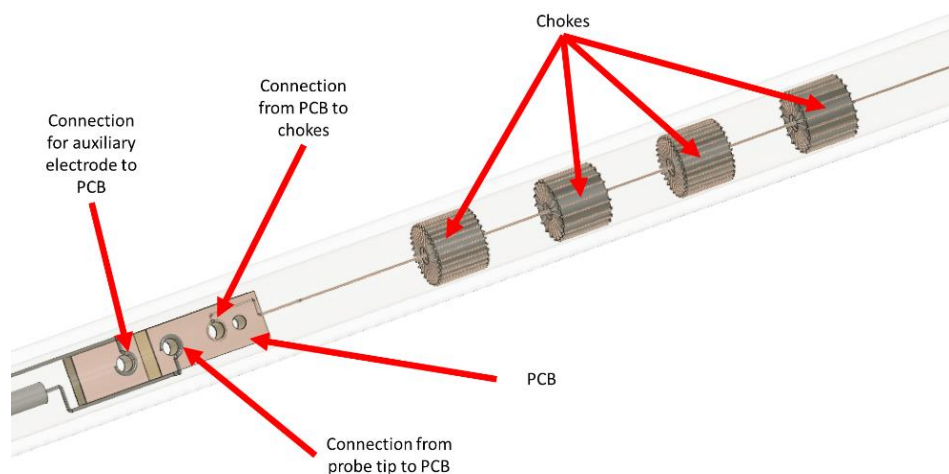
Middle section of the probe showing the front side. The actual probe takes screws in the holes for connecting the wires to the PCB but they have been omitted here for viewing purposes.
